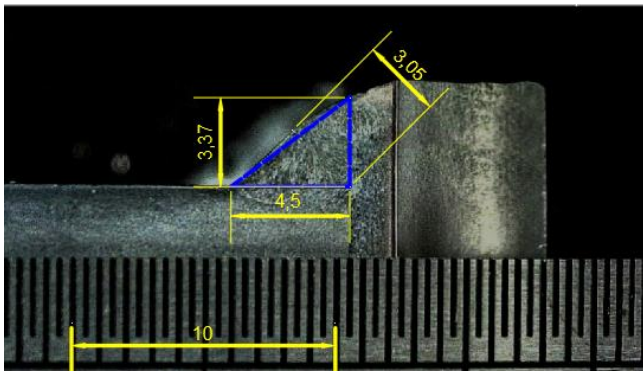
Repair by flush & reweld with filler 1,6 mm
